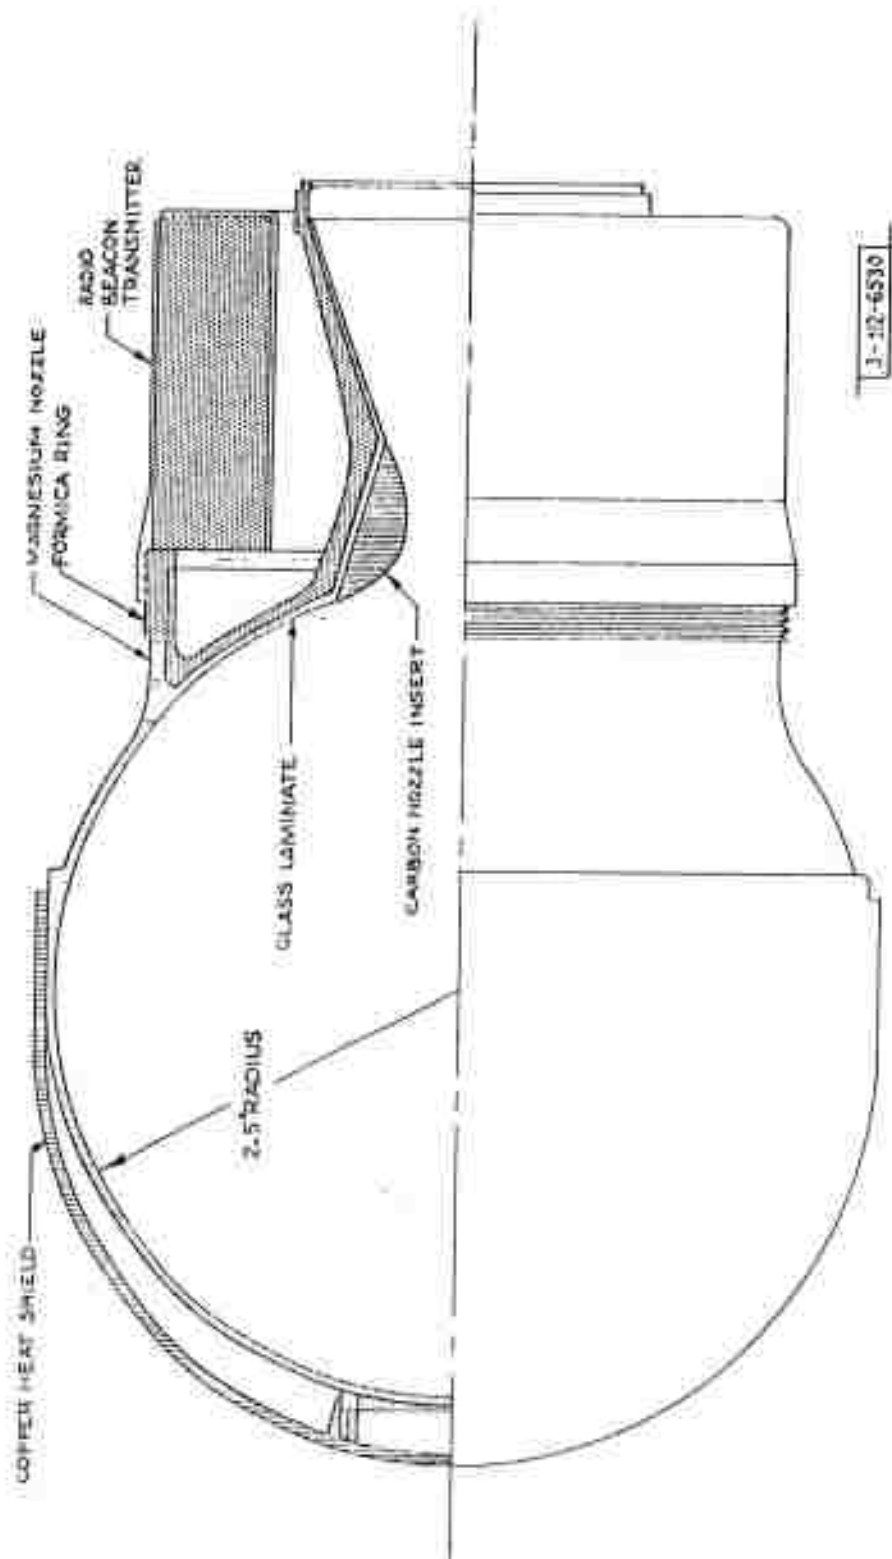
Detail drawing of Trailblazer If sixth-stage reentry body (5-inch diameter spherical rocket motor) equipped with copper heat shield.
